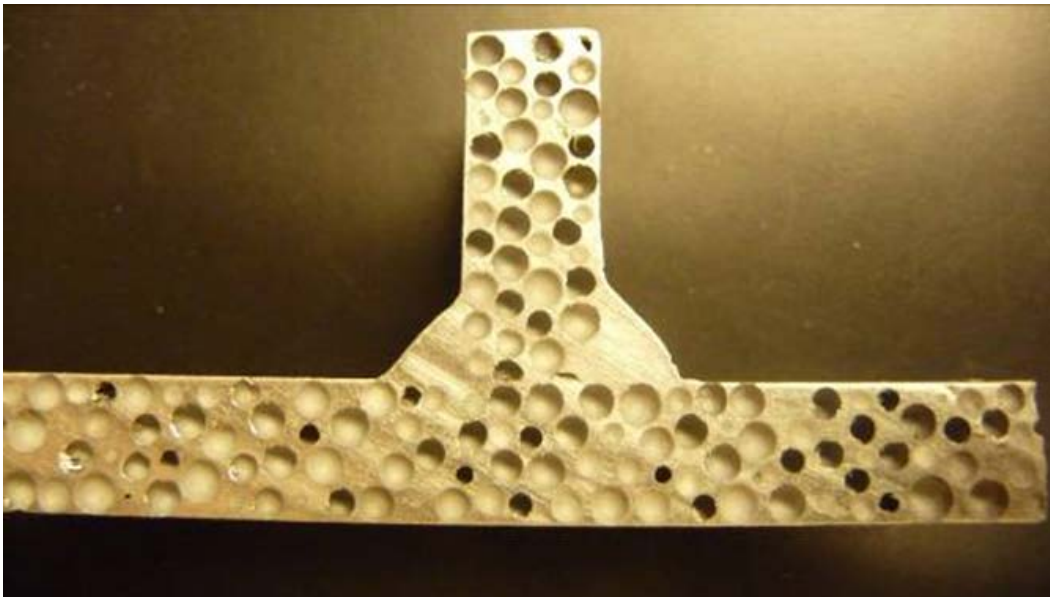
Cross section: A356/Al₂O₃ welded panels
